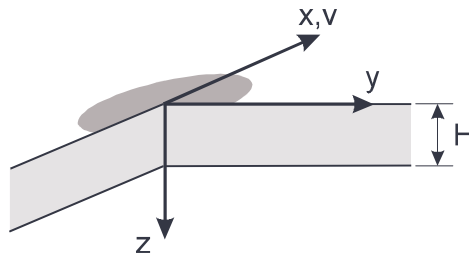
Coordinates system over a plate of finite thickness H , the welding speed v is also indicated
